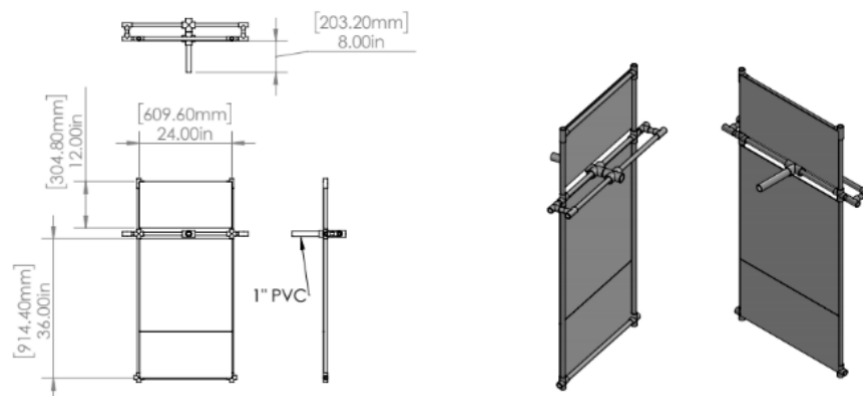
CAD drawing of buoys with dimensions. Specified in millimeters in the square brackets. Specified in inches outside the brackets. Courtesy Robosub RoboSub [2019]
